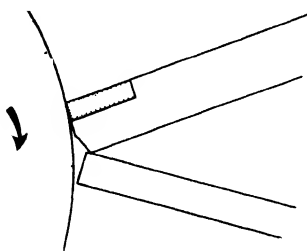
Rough Grinding the Tip on a Straight Wheel
